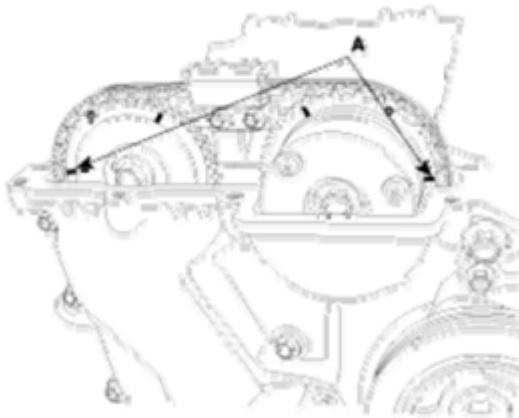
Identifying Mark On Camshaft Timing Sprockets
